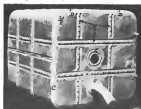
Welded aluminum fuel tank for Curtiss plane. A—Rivet heads. B—Side view. C—Welded corner joint. D—Position hinge. E—Coverhatch.
